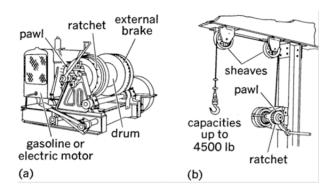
Powered and hand winches. (a) Heavy-duty single-drum winch. (b) Wire-rope hand winch
